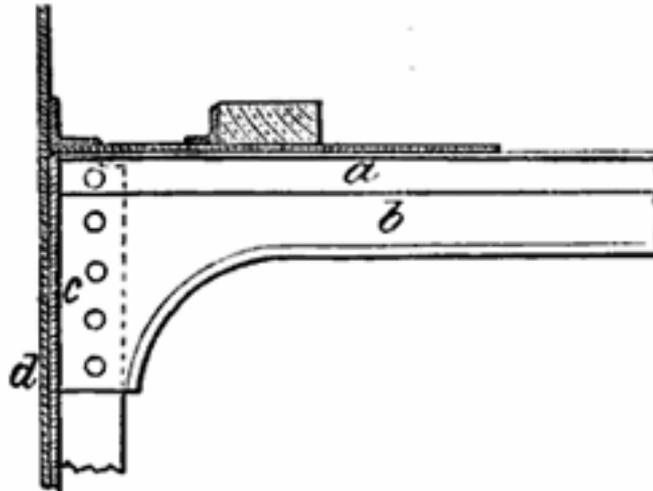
a. Reverse Bar. b. Beam. c. Inside Sheerstrake. d. Outside Sheerstrake
